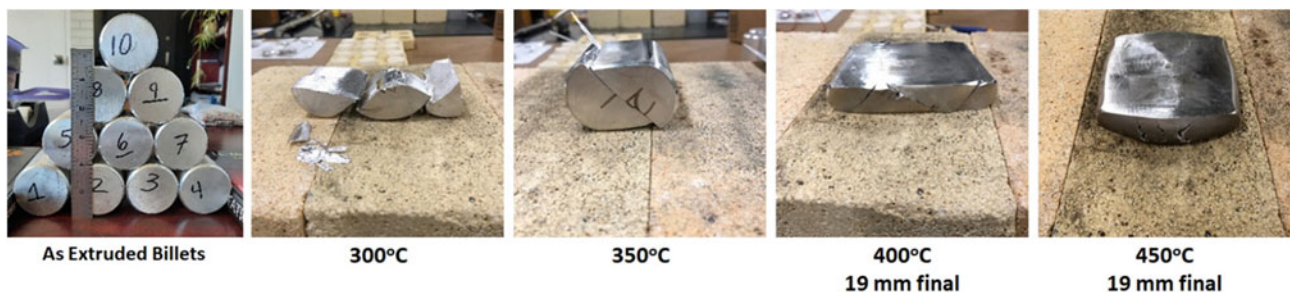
Images of machined “as extruded” forging billets (left) and results of initial forging test matrix (forging temperature indicated) with platens heated to 200 °C and a platen speed of 2.54 mm/s
